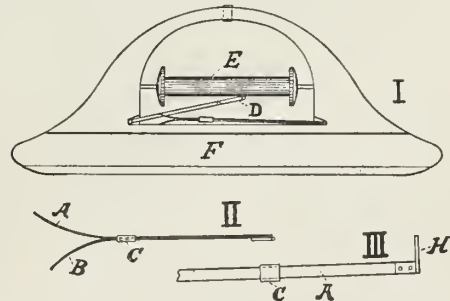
, represents a shuttle provided with a quill, a lever, and the improved tension-spring adapted to operate said lever. Fig. 2, represents the tension-spring, guiding-strip and sliding connecting-piece, being a side view thereof. Fig. 3, is a top view of spring, slide and pin for securing spring in shuttle.
